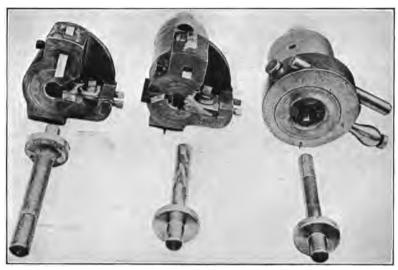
Box tools for turning valve stems for blow-off cocks.
